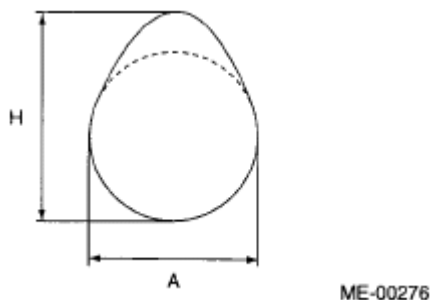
Identifying Cam Lobe Height H And Cam Base Circle Diameter A
